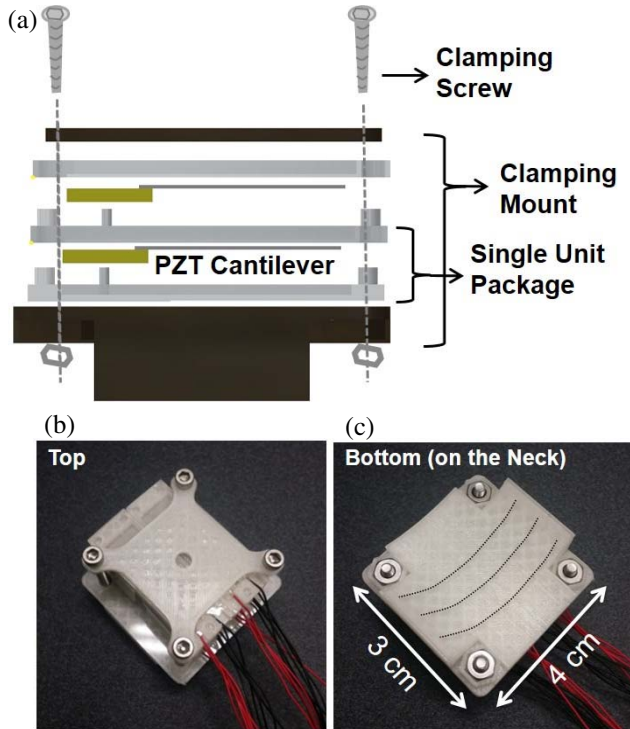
Device packaging with components produced using a 3D-printer: (a) an illustration of the stacking process. (b) clamping using our packaging components; and (c) a 10-stacked energy harvesting (EH) array with a curved bottom surface.
